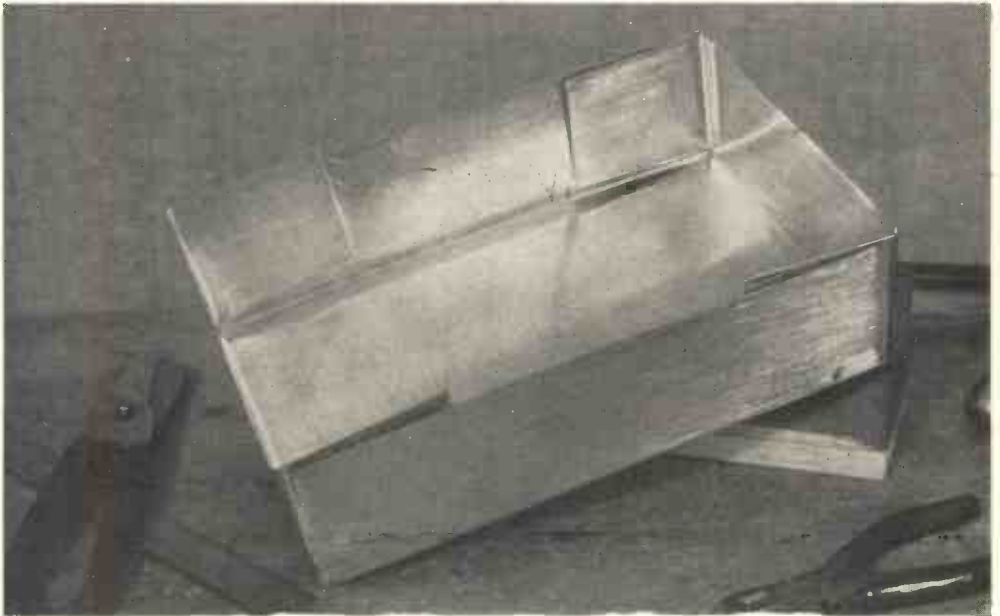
SHOWING THE CHASSIS AFTER COMPLETING ALL BENDS.
